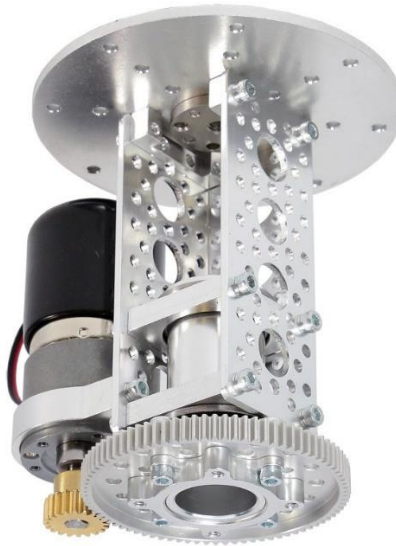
Hollow-Shaft Gear Drive Pan Kit
